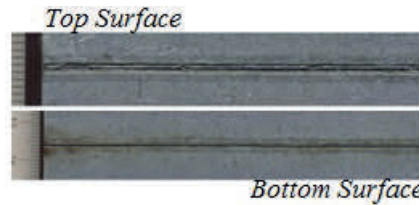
6 Welding specimen prepared for cross section observation
